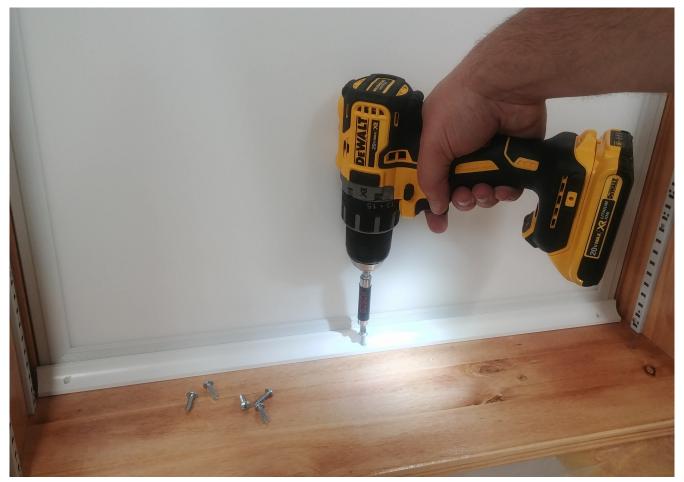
Install the two pieces of inside corner moulding tight up against the LED panel to hold it in place in the L-channel.
